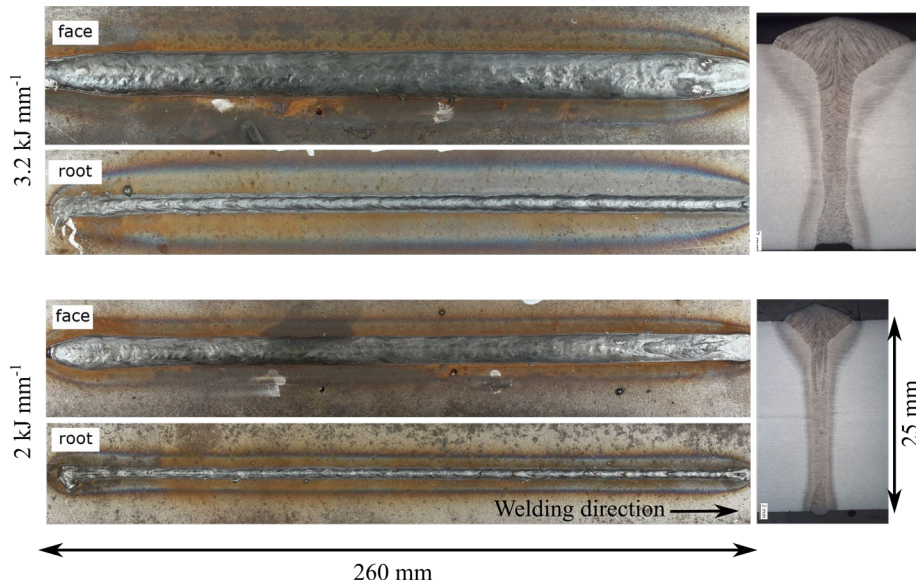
The face and the root of the single-pass hybrid laser arc welded 25 mm thick joints with electromagnetic weld pool support technique: Case 1 (top); Case 2 (bottom).
